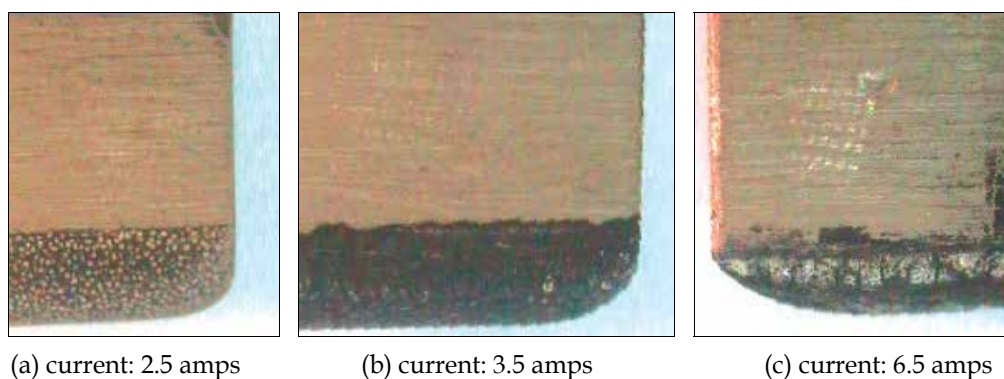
Wear of brass electrodes; electrode - brass, workpiece - aluminum
